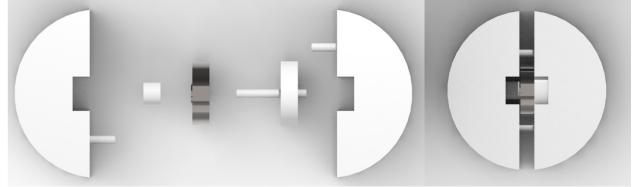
(A - Left) Grip Strength Sensor (Exploded), (B - Right) Grip Strength Sensor Assembled.
